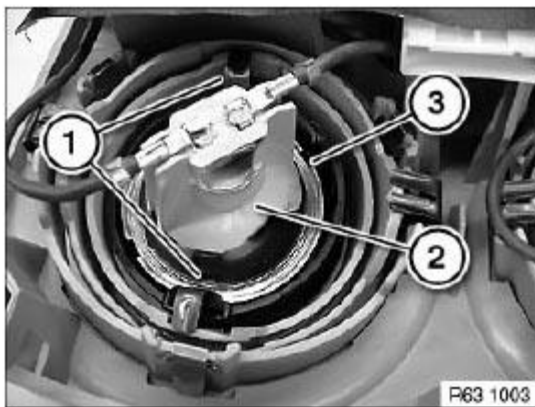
Identifying Retaining Spring And Reflector With Guide
